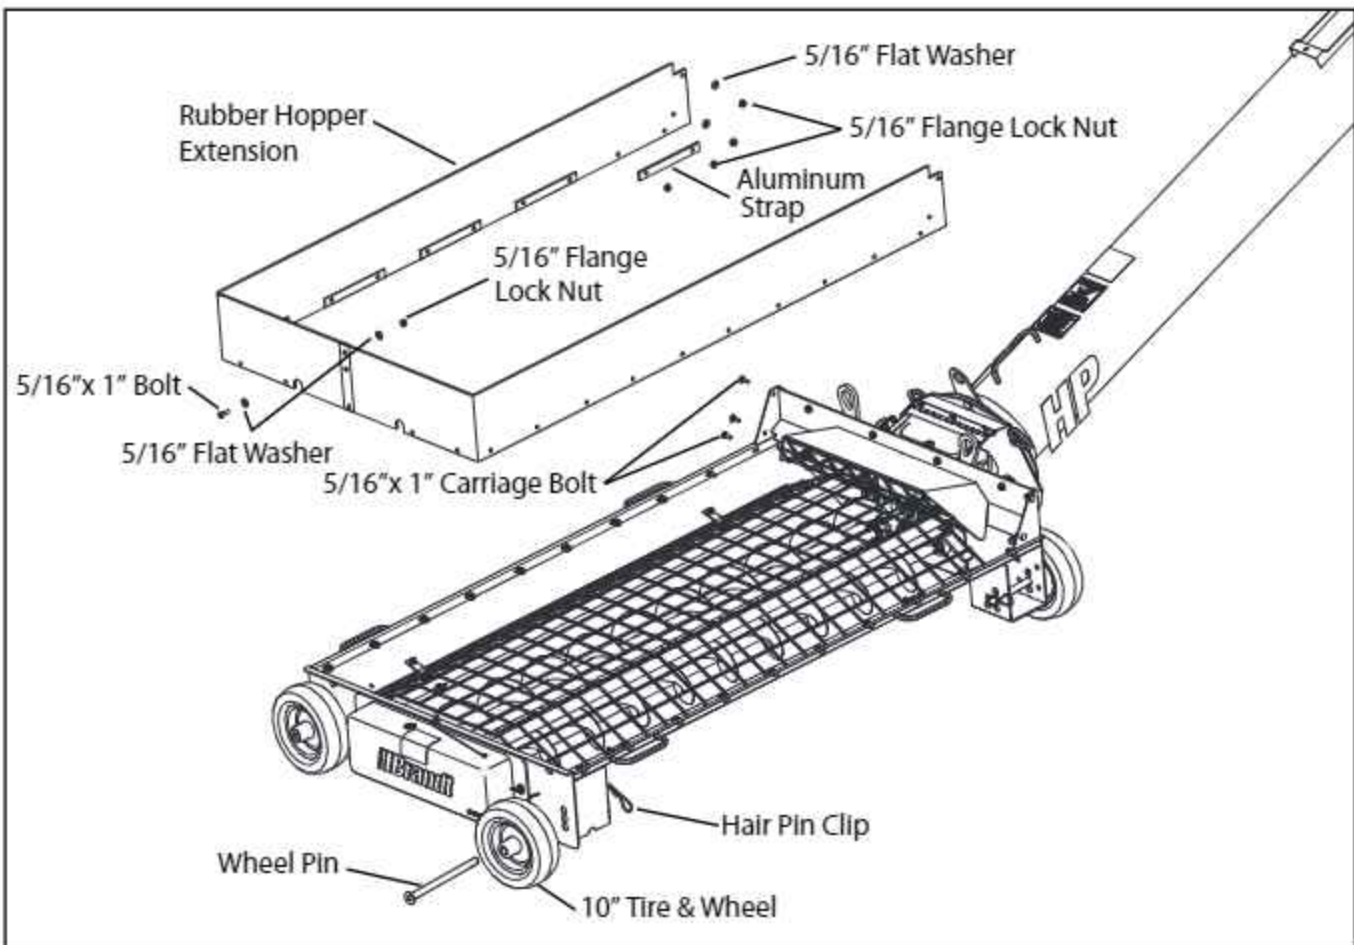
Hopper Extension & Hopper Wheel Assembly
